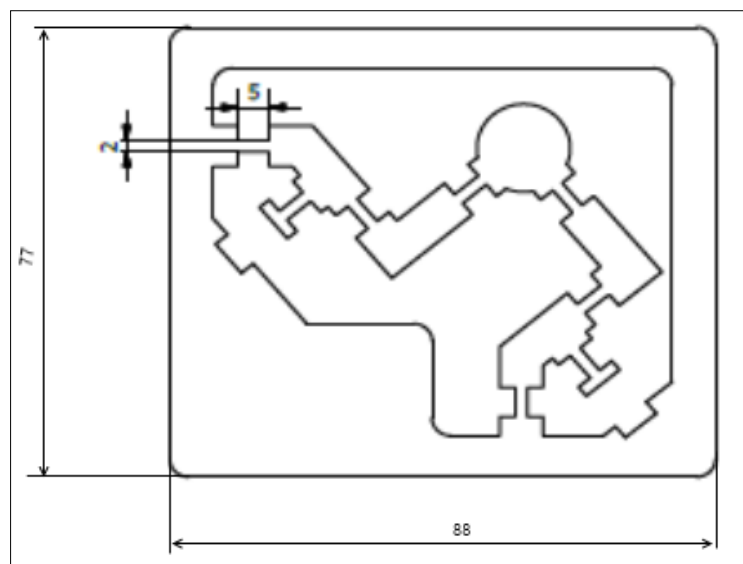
The technical drawing of the positioning mechanism with rectangular joint
